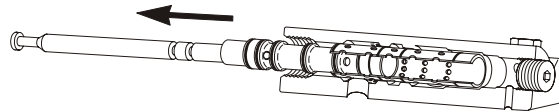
Insert tool in second row of holes in sleeve and if necessary, pry out with screwdriver.
